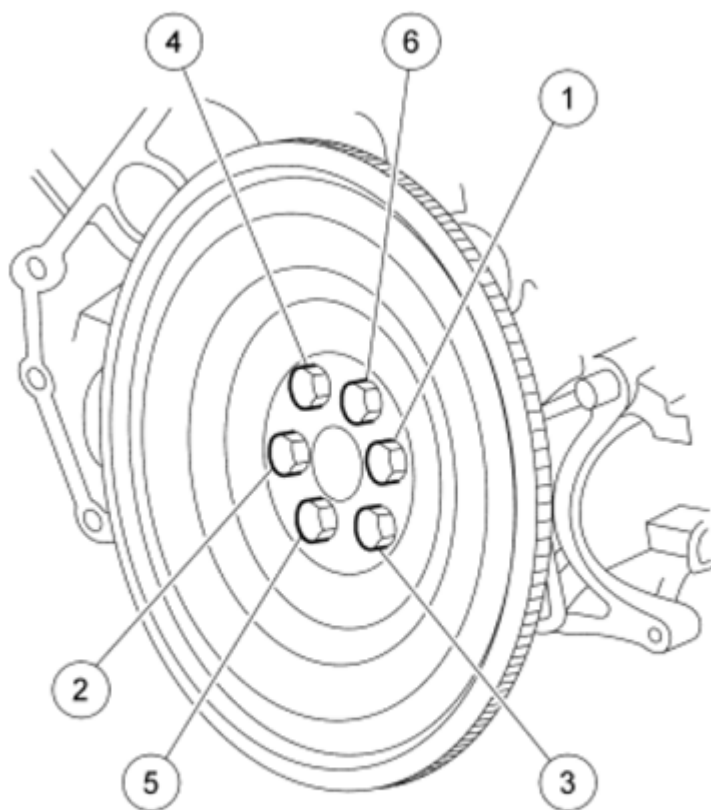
Identifying Flexplate Mounting Bolts Tightening Sequence
